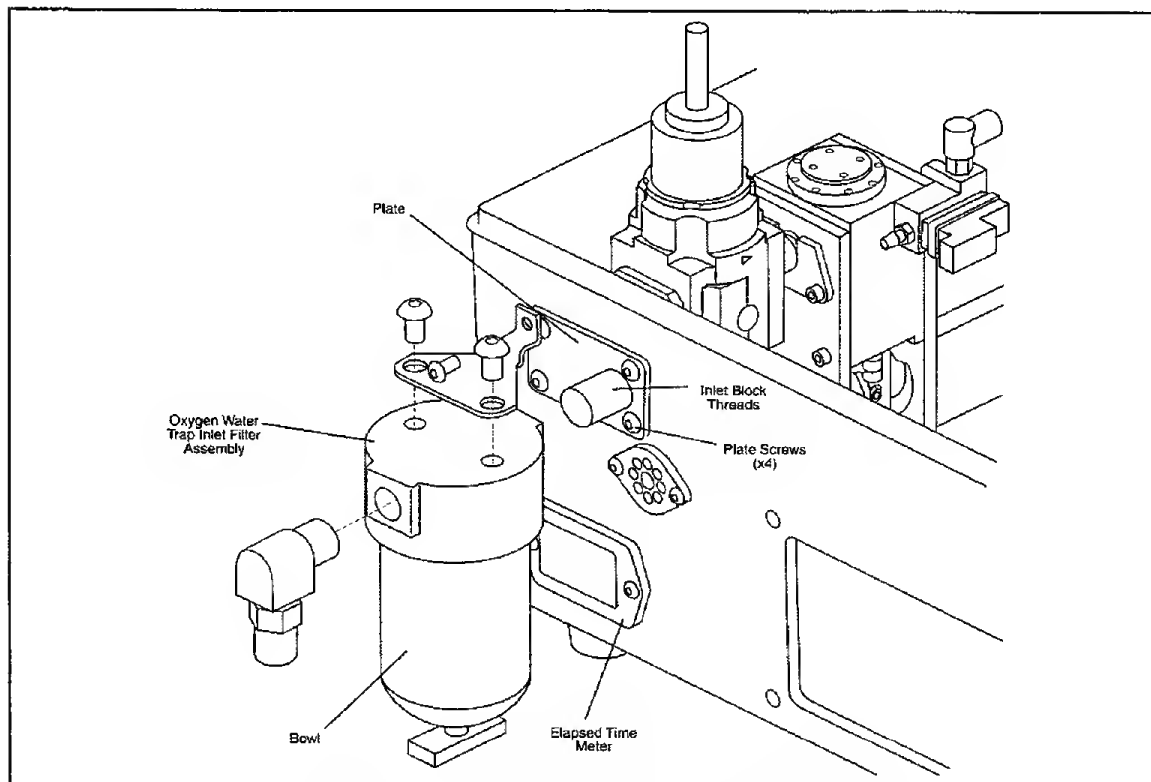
Oxygen Water Trap/Inlet Filter Assembly
